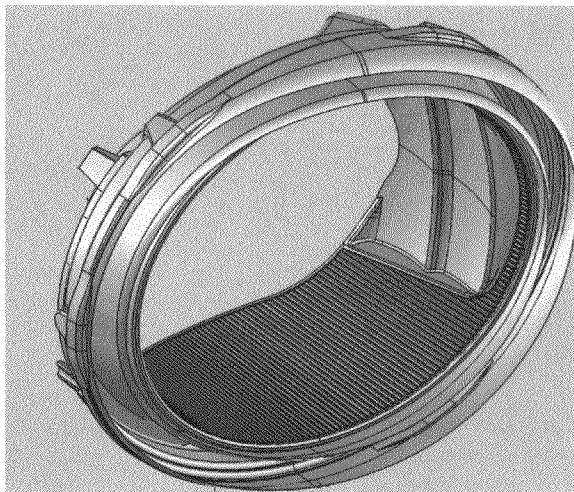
is a perspective view of the lighting device component shown in FIG. 1;
